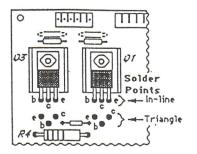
REV.-E VERSION POWER SUPPLY SHOWING BOTH SETS OF TRANSISTOR LEAD SOLDER POINTS.
